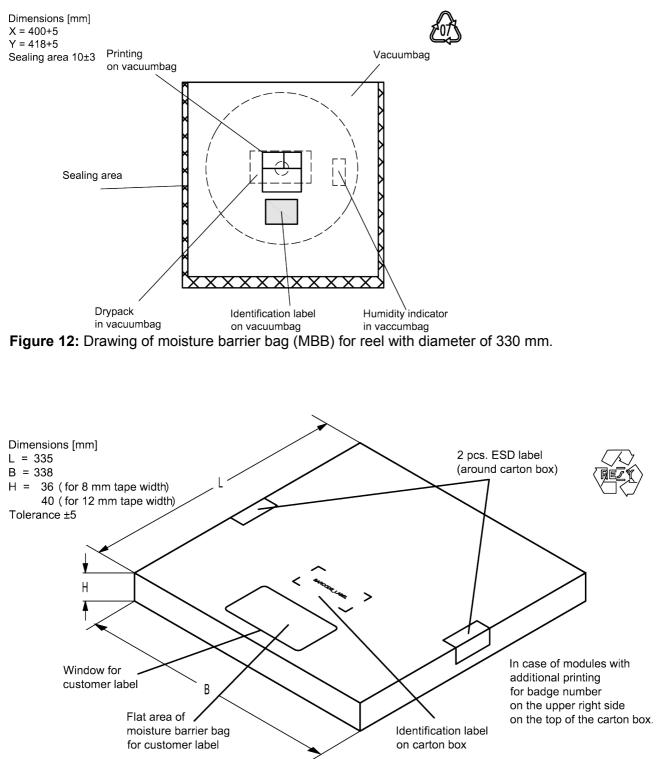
Drawing of folding box for reel with diameter of 330 mm.
